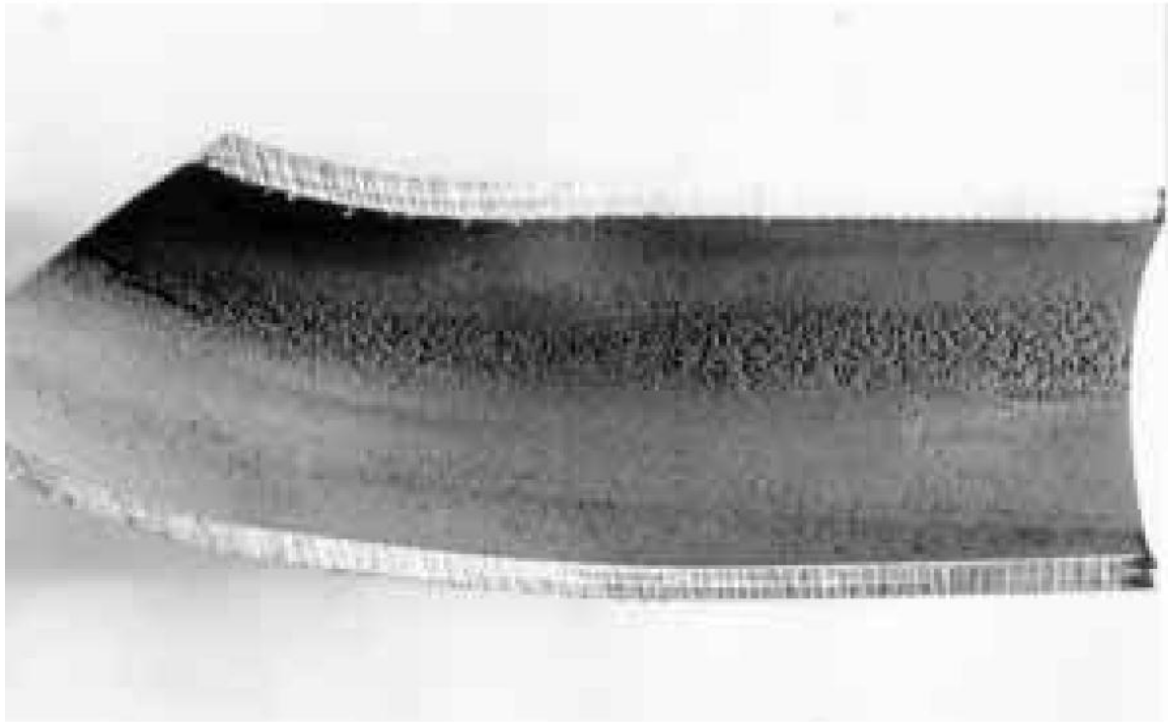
Internal of superheater tube subjected to pitting corrosion [9]
